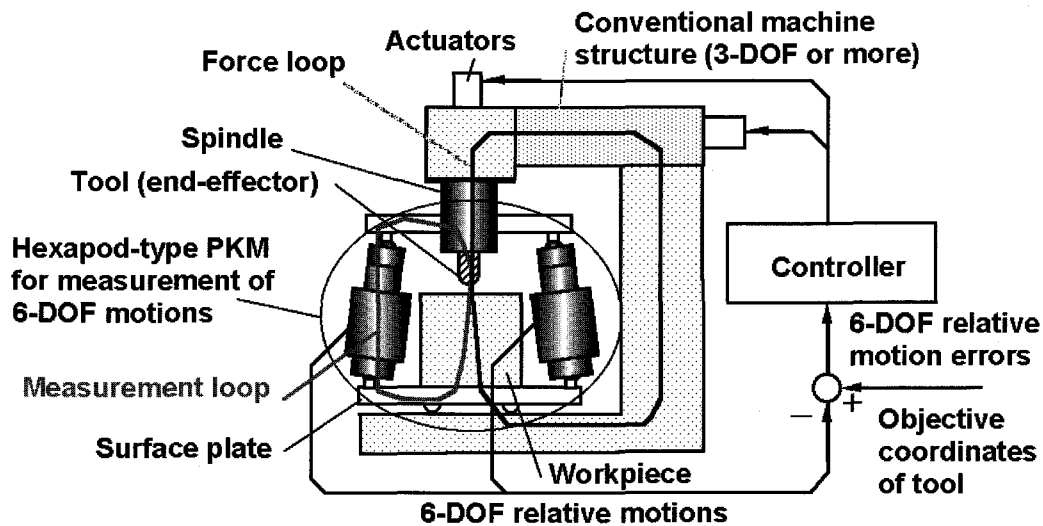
Fundamentals of the proposed machining system using a hexapod measurement device for 6-DOF motions between the tool and workpiece
